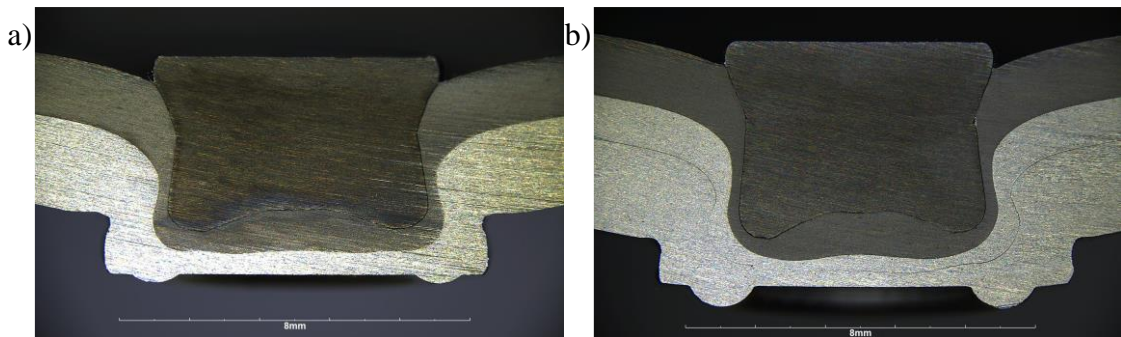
Cross section of a joint of 2 sheet 1.4mm DP600GA – 2mm AA6061 (a) and 1.4mm DP600GA – 1mm AA6061 – 2mm AA6061(b)
